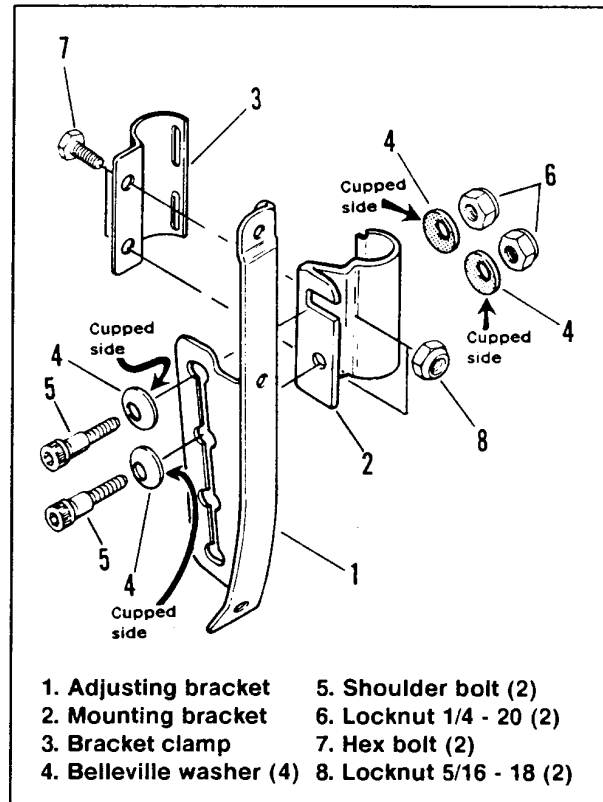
New Compact Windshield Mounting Hardware -- Right Side
